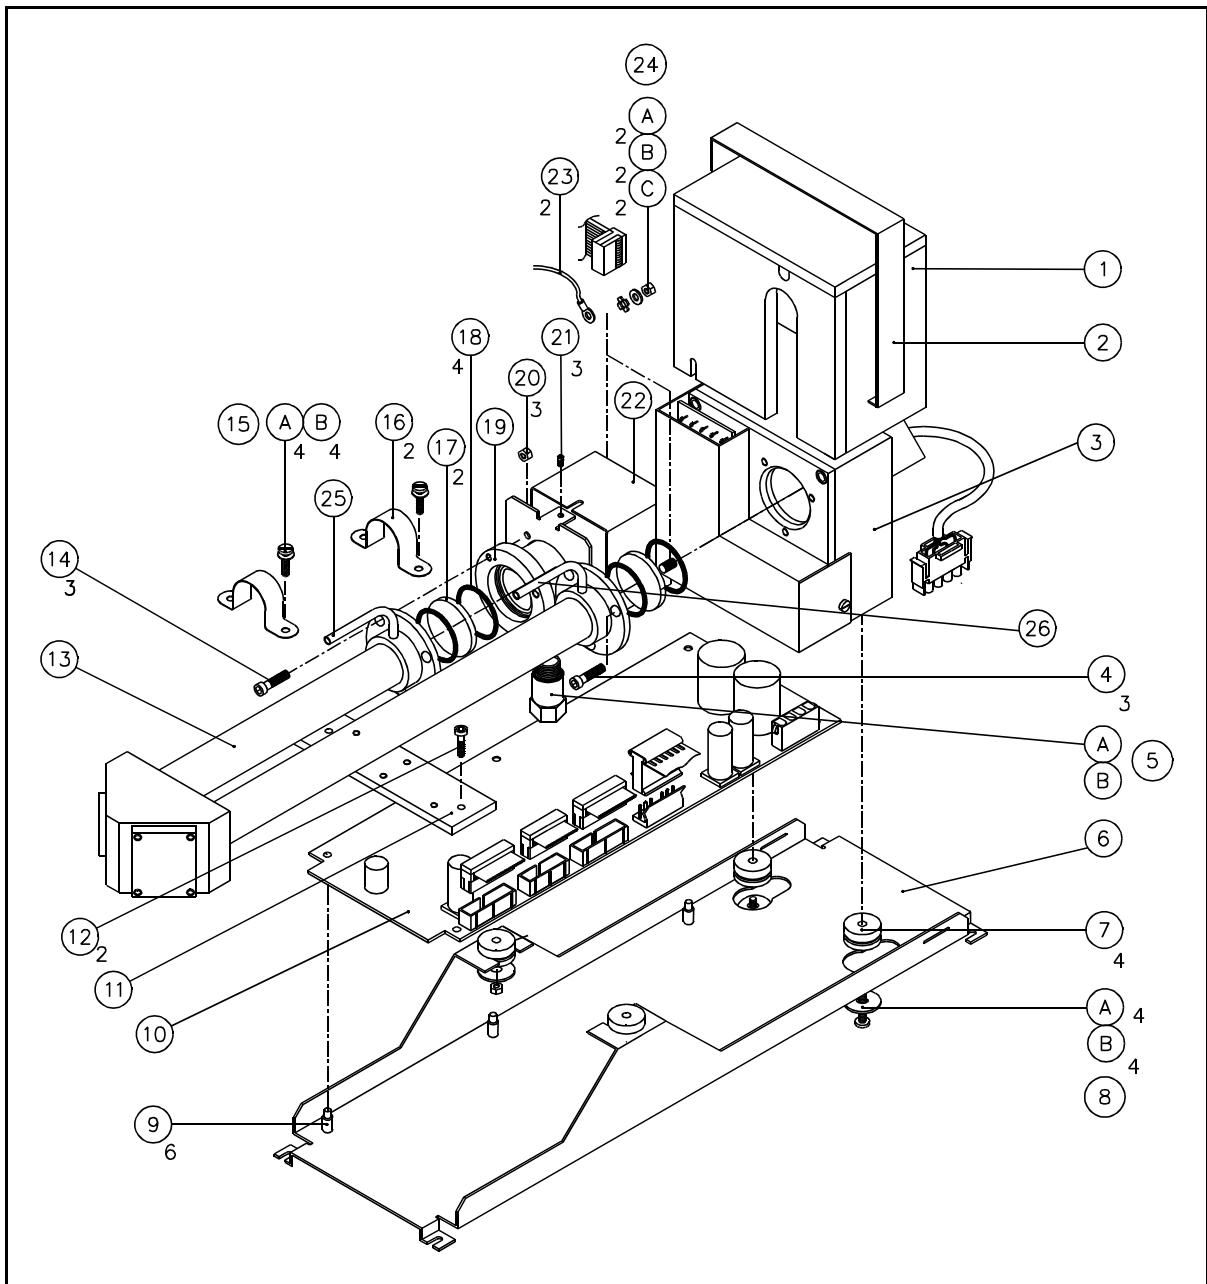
1210 High sensitivity Gfx gas sensor assembly
